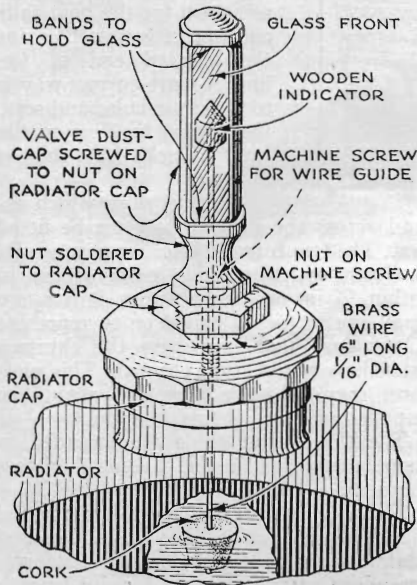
Indicator of old parts can be assembled as shown to register water in radiator
